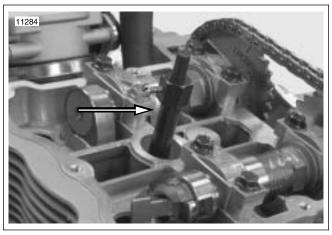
Top Dead Center Positioning Tool (HD-45653)
